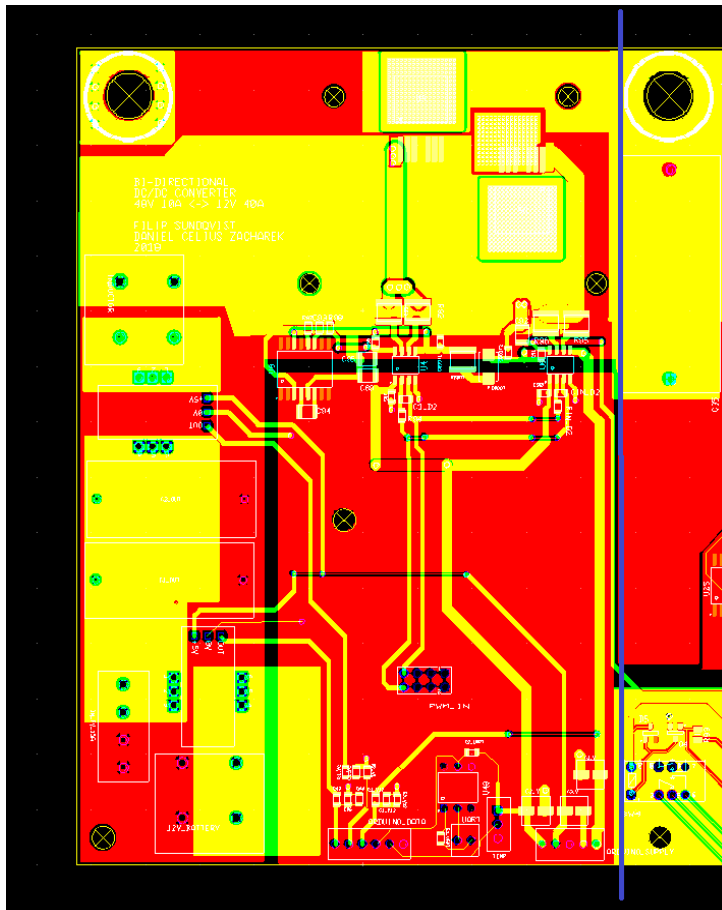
Closeup of PCB design for DC/DC converter (left of blue line)
